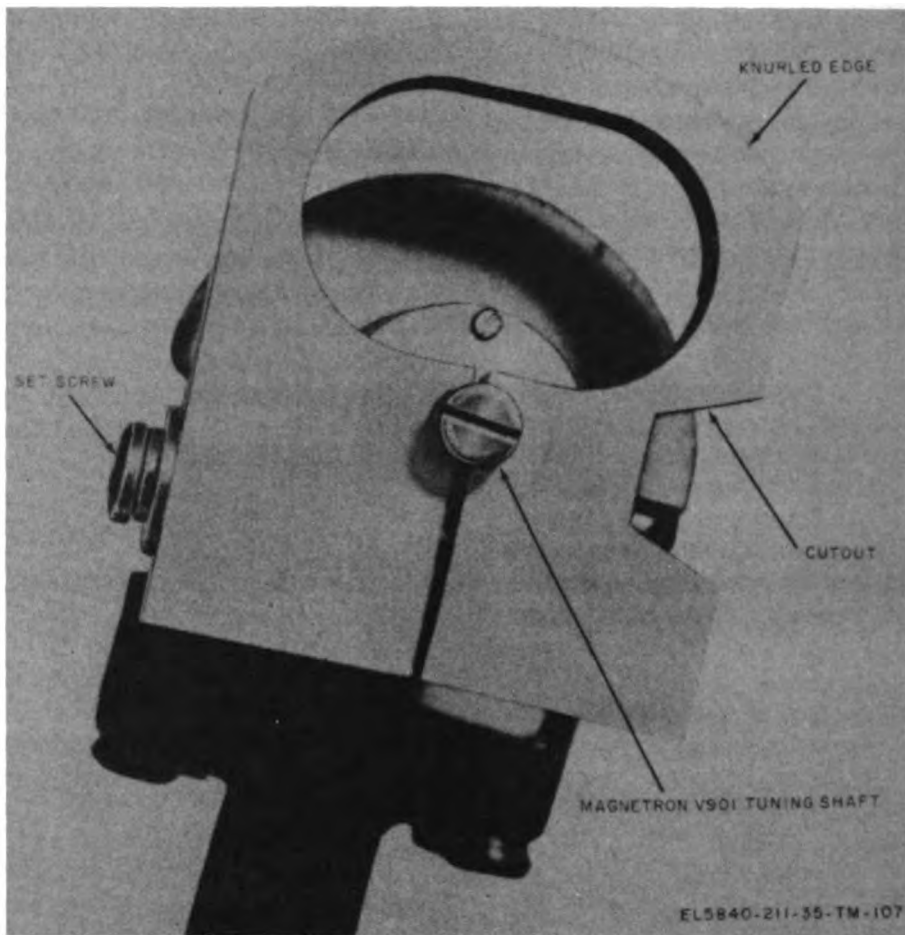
Magnatron V901, knurled tuning knob assembled.
